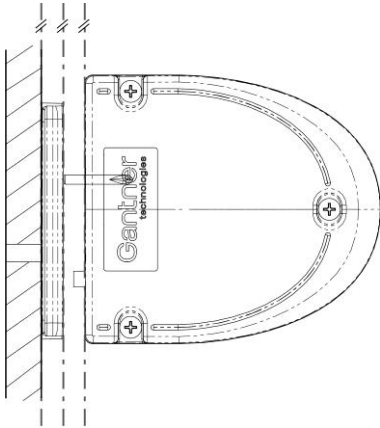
Mounting of the GAT NET.Lock 7000 in a locker with non-metallic door (right door)
